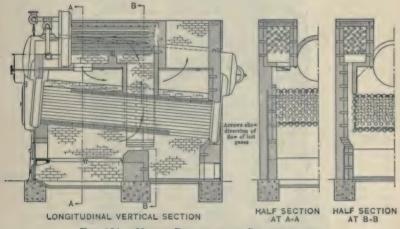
HEINE BOILER WITH SUPERHEATER.
